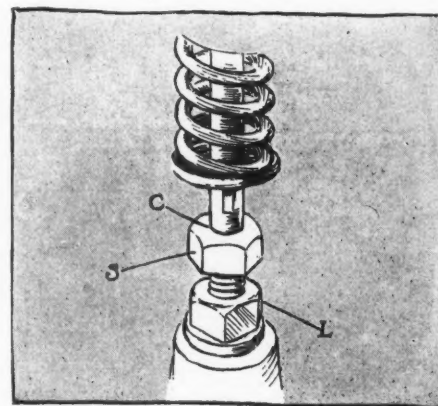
METHOD OF ADJUSTING VALVE TAPPET
